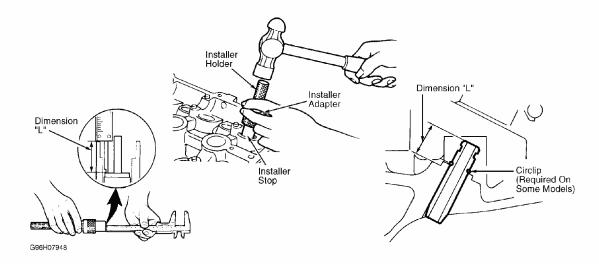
Adjusting Valve Guide Installer & Installing Guide Courtesy of MAZDA MOTORS CORP.
